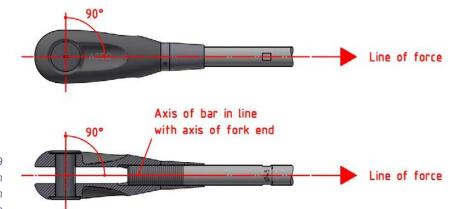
Alignment of pin and thread with line of force After casting, the fork ends were CNC machined to form the pin holes and threaded bore to receive the tie rod. It is vital that these are made as accurately as possible and are in line with the load axis of the complete system (Figure A.19). As the sand casting process is not accurate enough to achieve this, the pin holes and thread bore are cast with excess material to allow machining and accurate placement. Previous failures in these types of castings have been due to poor alignment of load bearing surfaces giving rise to additional stresses and bending.
